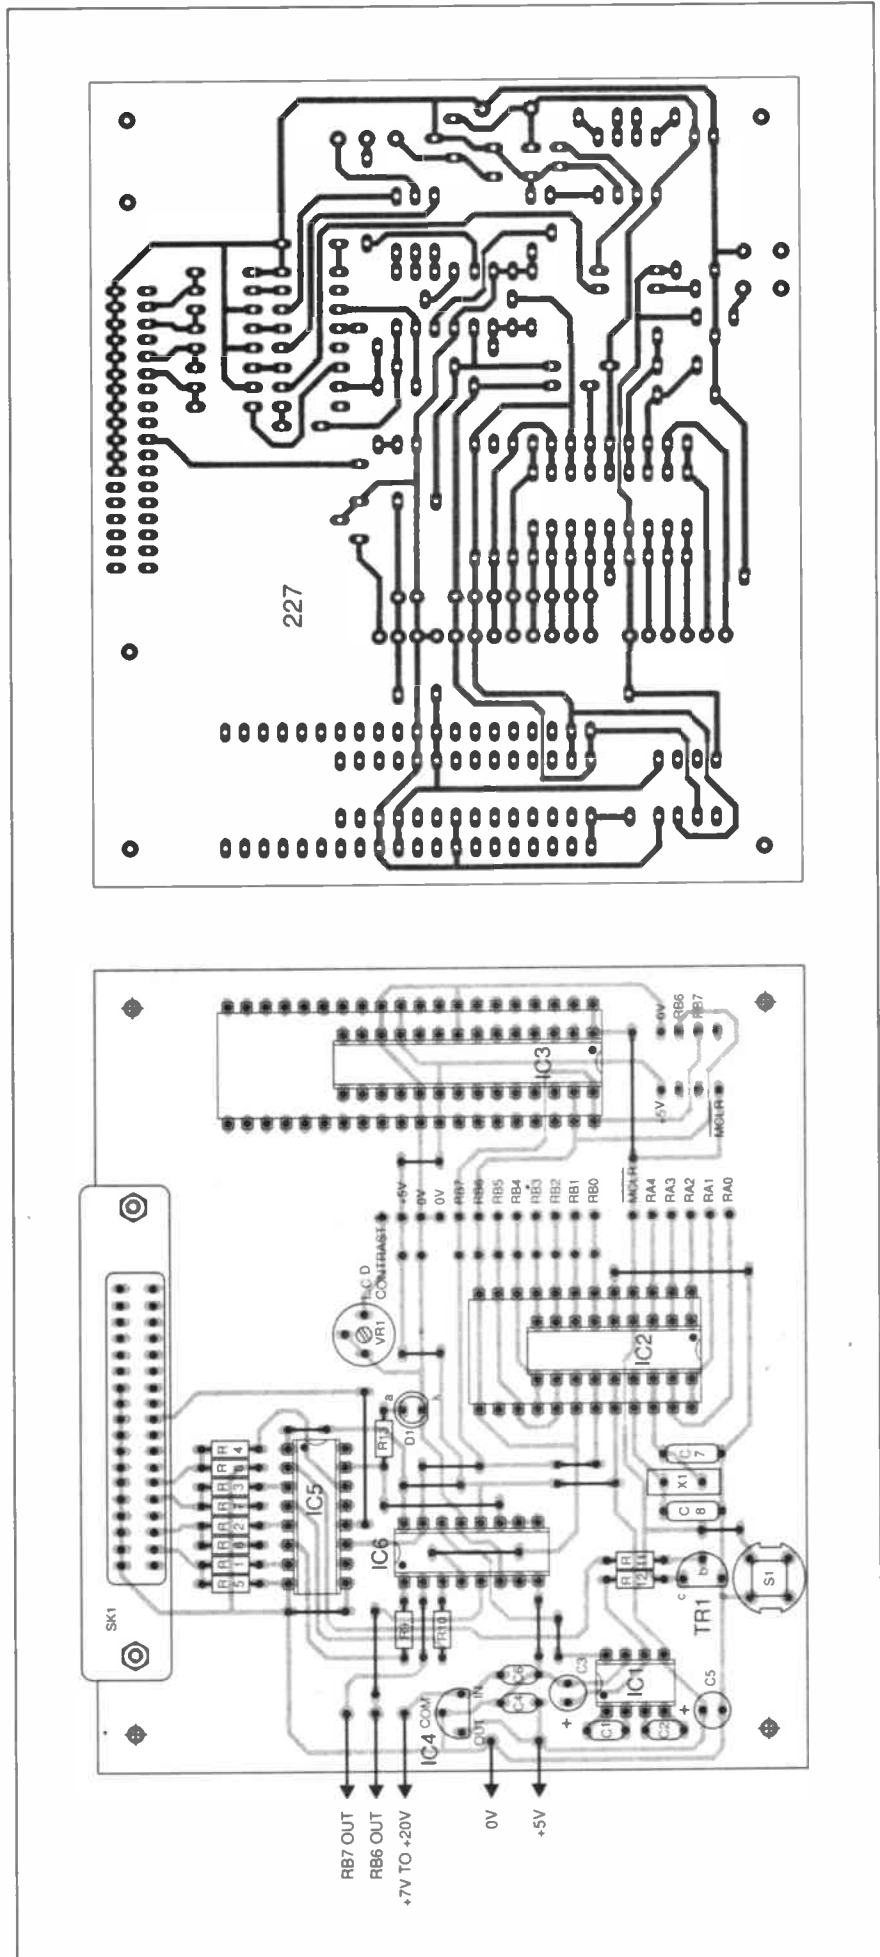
Component and full size track master pattern layouts for PIC Toolkit Mk2.
